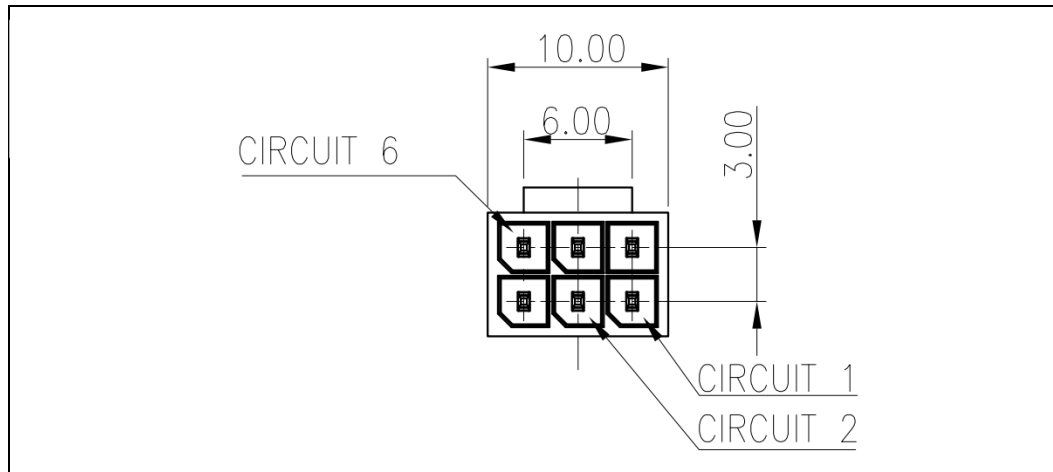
3 mm SATA Power 6 Pin MB Header – Recommended PCB Layout (Top Layer View)
